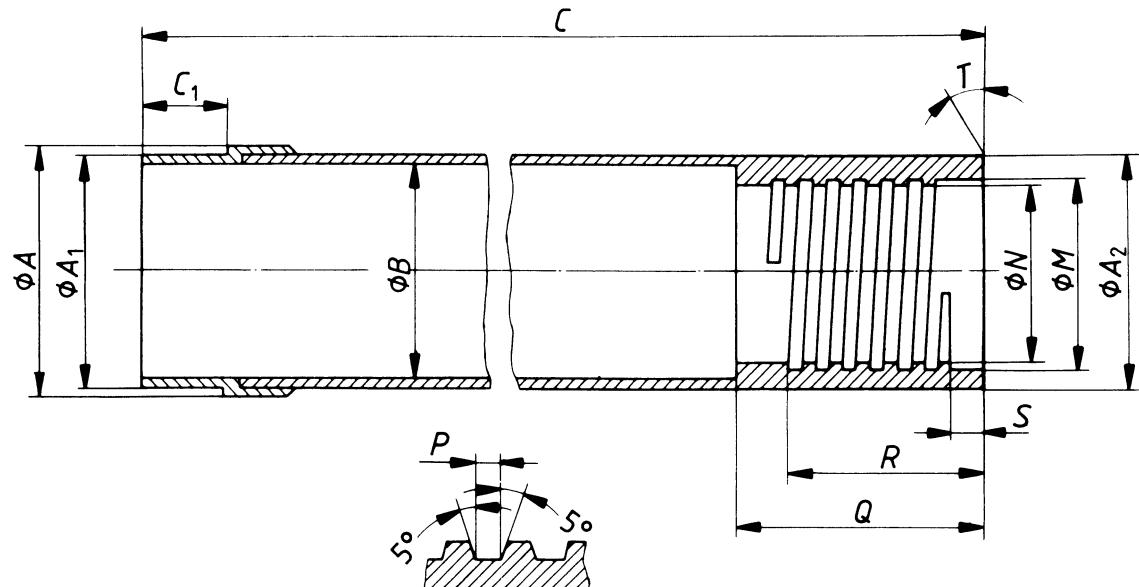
“WF” design double-tube core barrel — Inner tube (see Table 26)
